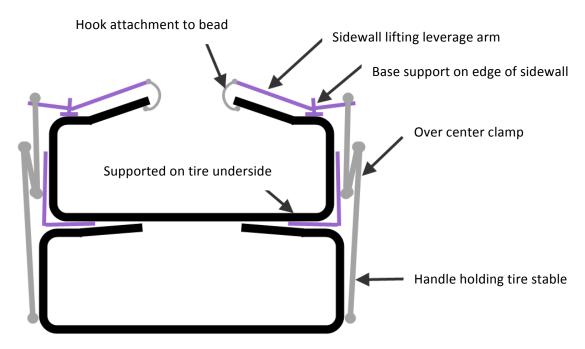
Evolved concept sketch of sidewall lifting mechanism.
